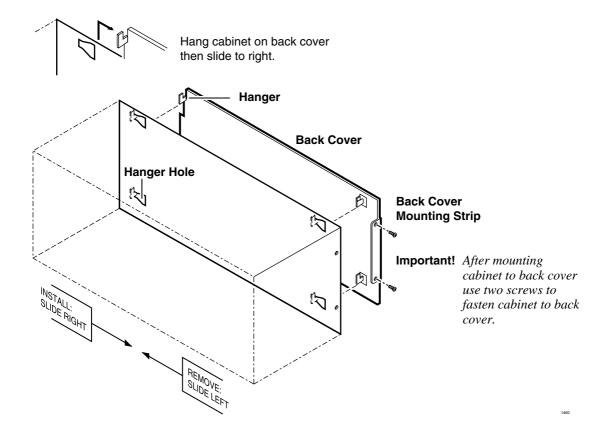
CTX670 Mounting Cabinet on Back Cover
